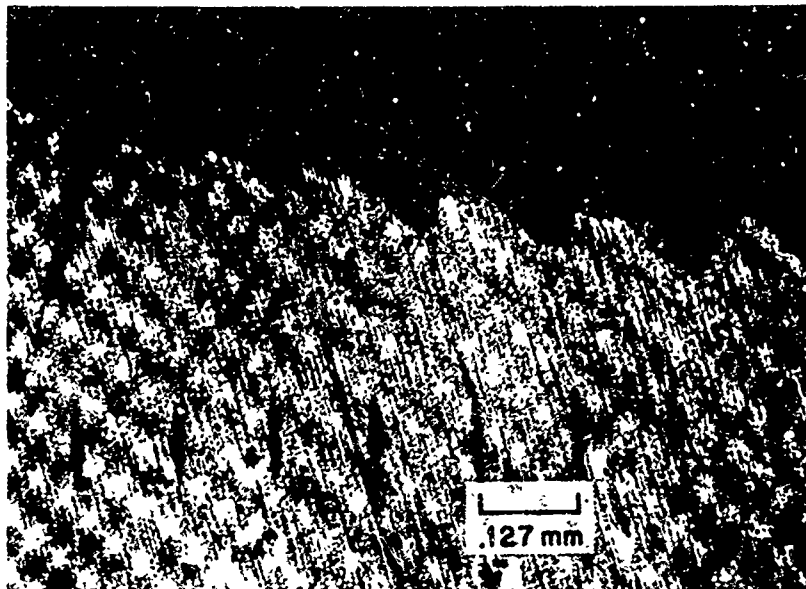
Sawtooth Structure Produced by Forceful Separation of Welded Plates
